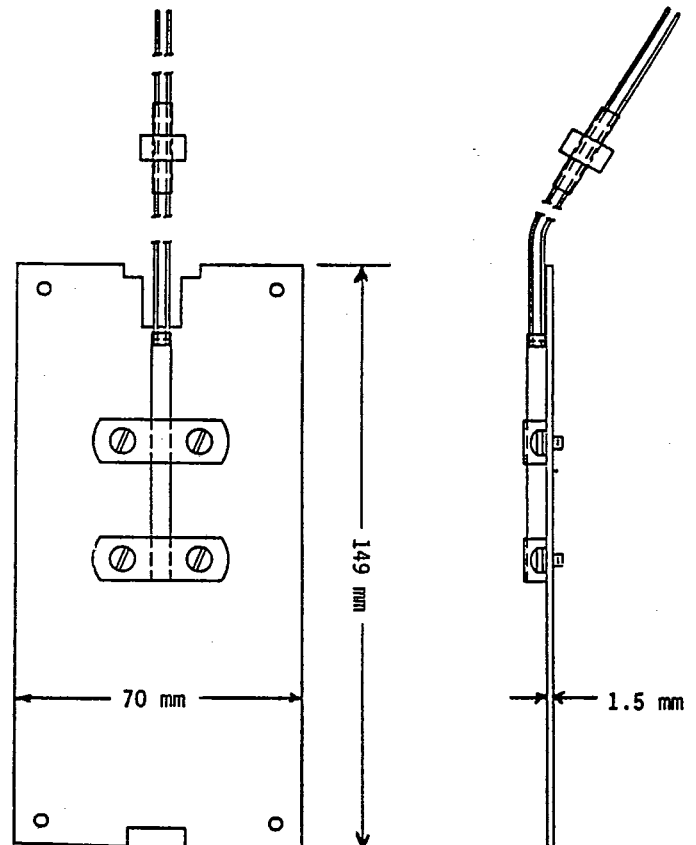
Black Panel Thermometer Unit Using RTD Thermocouple Sensor
